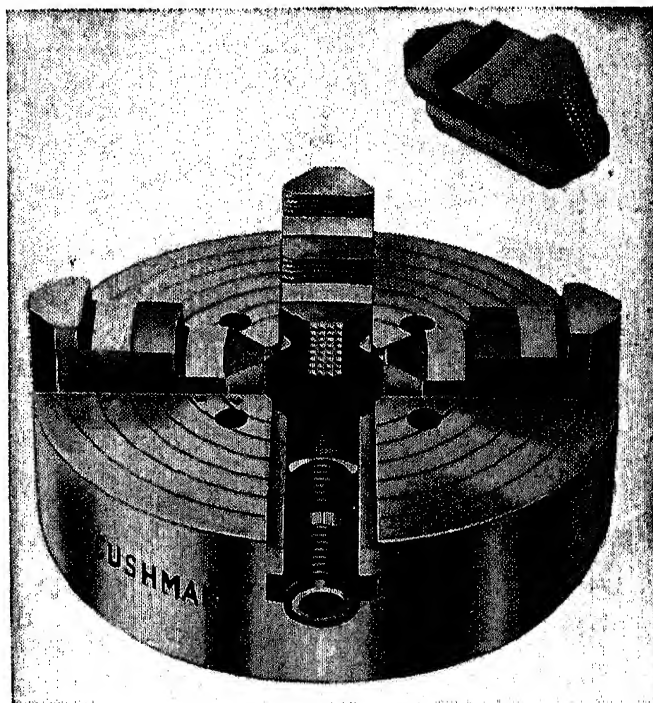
A four jaw independent chuck. One jaw has been removed to show an operating screw. (Courtesy The Cushman Chuck Co.)
